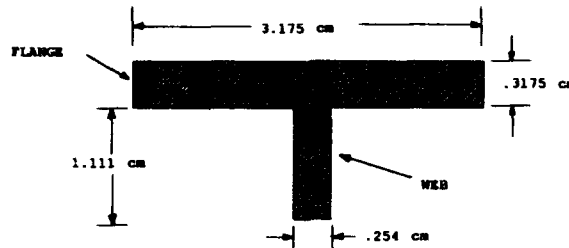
T-beam cross section for the SFP produced truss longitudinal and cross member.
